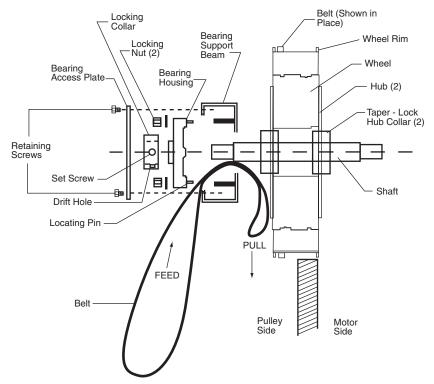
Belt Replacement (Diameter Seals Removed)
